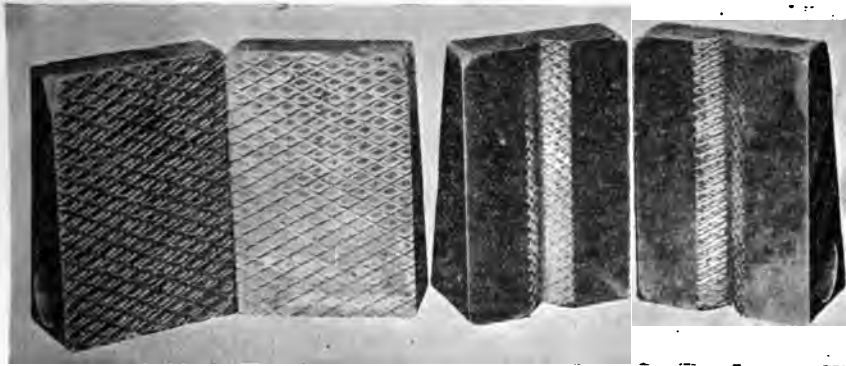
Flat and Grooved Wedges for Tensile Tests.
